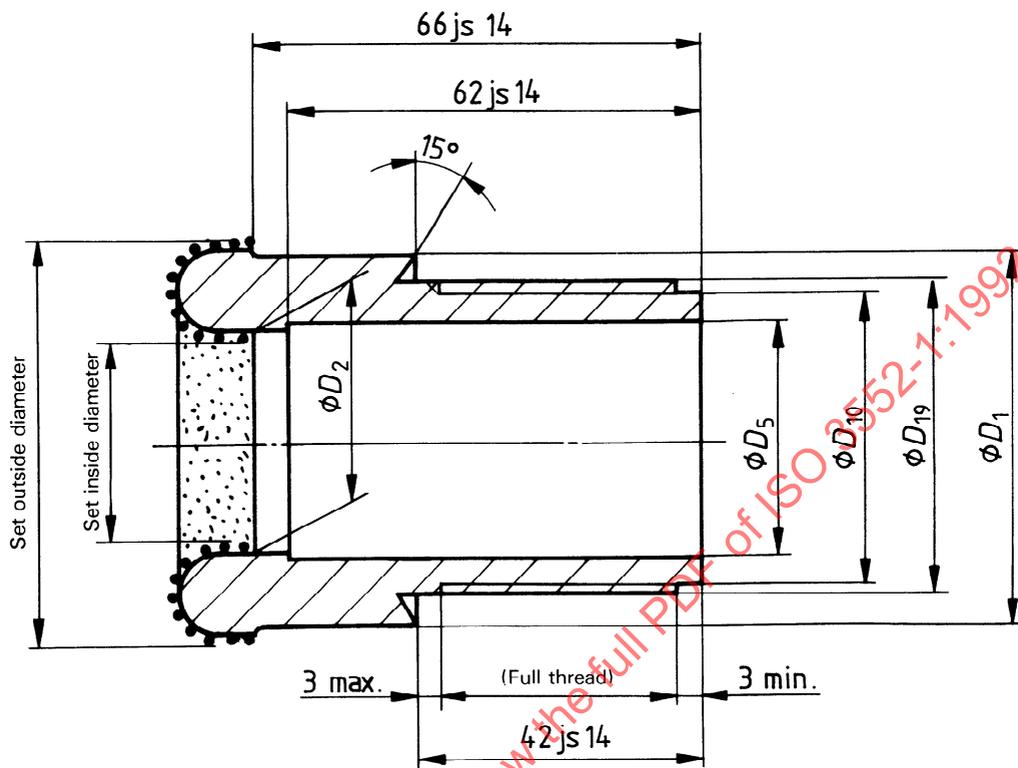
Core barrel, Type Z — Bit (see table 25)
